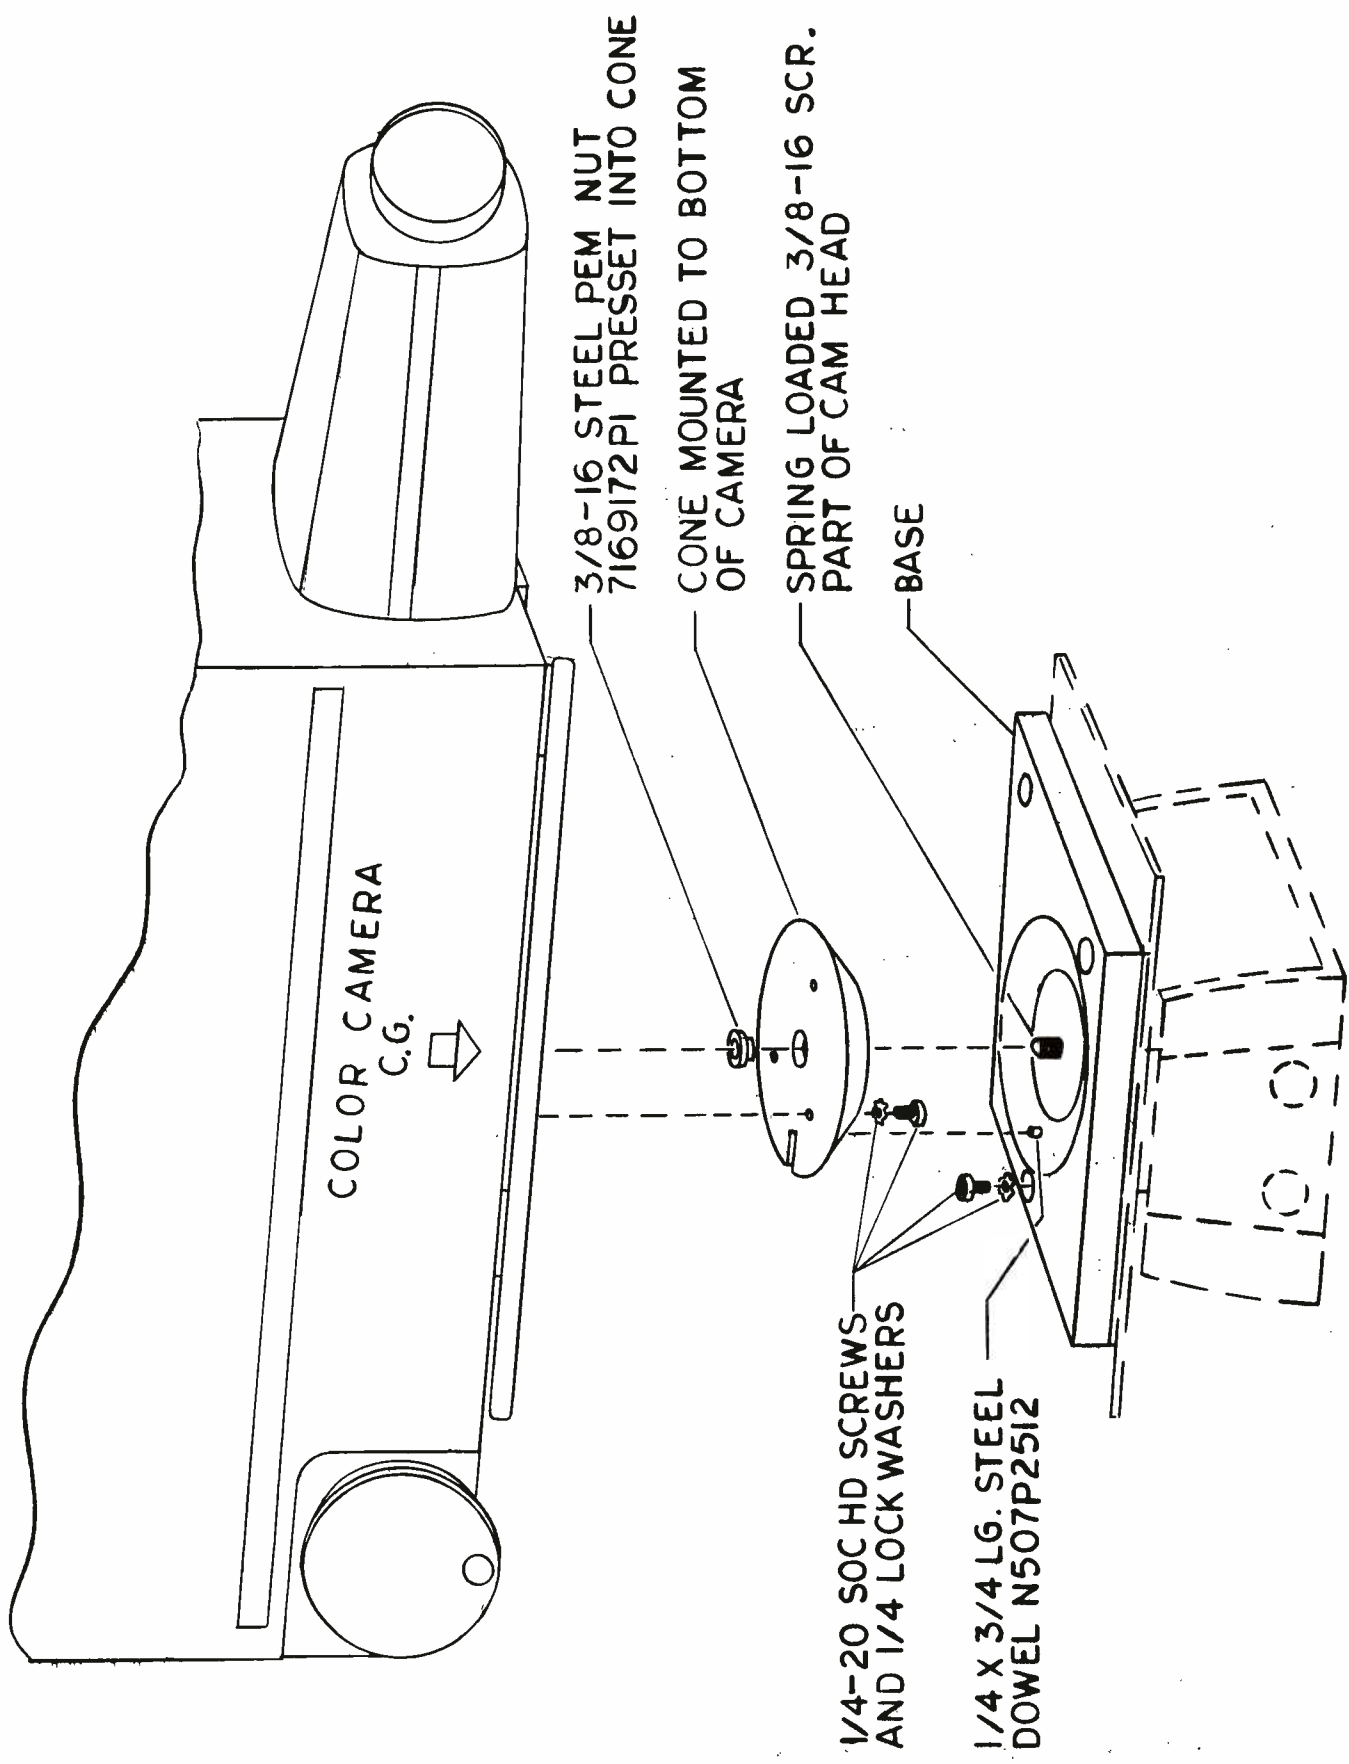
Color Camera Cone Mounting Diagram (D-7674271, Sheet 3, Rev. A)
